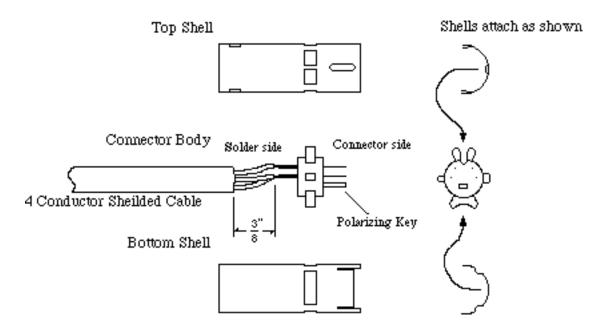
Assembly details of the inner portion of a 4 pin mini-DIN male connector. The details for the 6 pin mini-DIN are similar except for the pin pattern.
